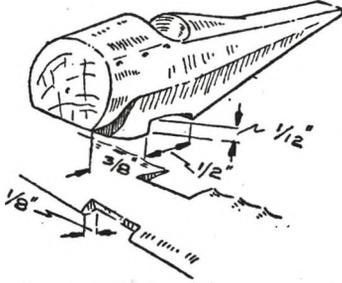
Showing shape of fuselage and method of mounting on lower plane.
